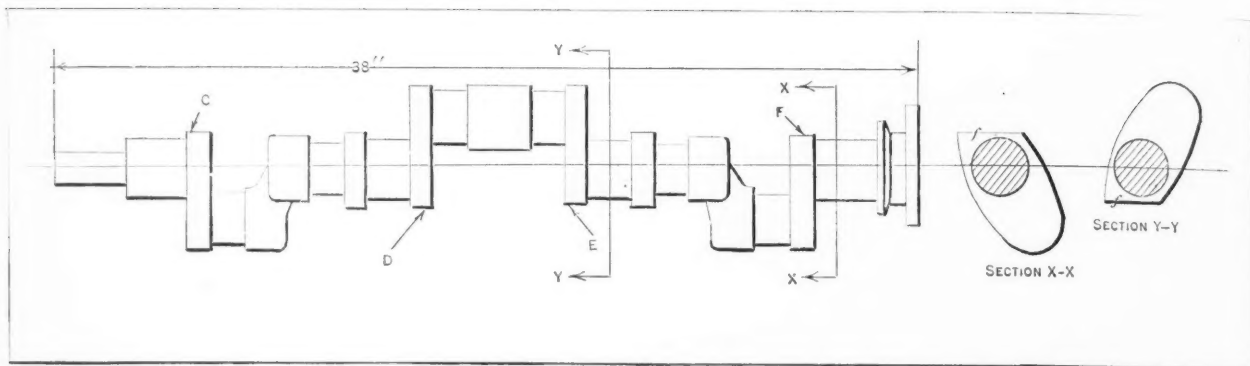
Type of Crankshaft Milled on Machine Shown in Fig. 1
